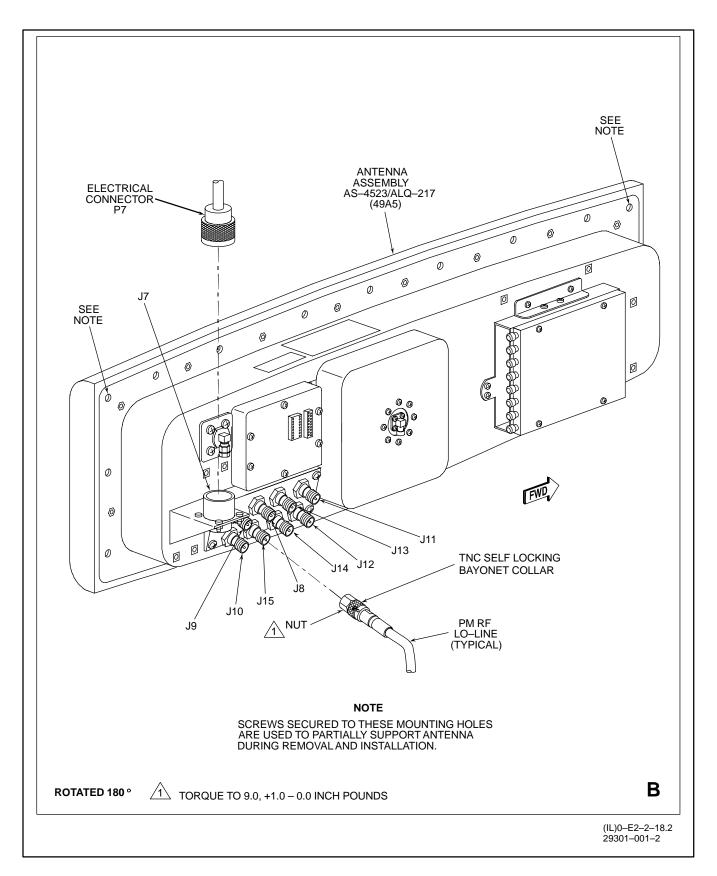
Removal and Installation of Antenna Assembly AS-4523/ALQ-217 (49A5) (Sheet 2)
